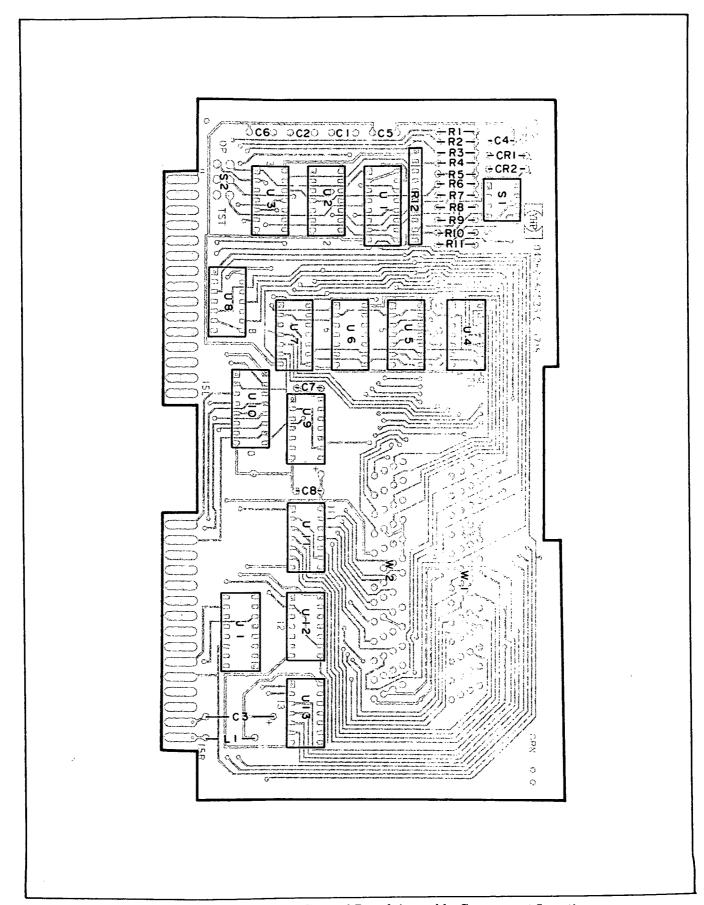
A35 BCD Output Control Board Assembly Component Locations.
